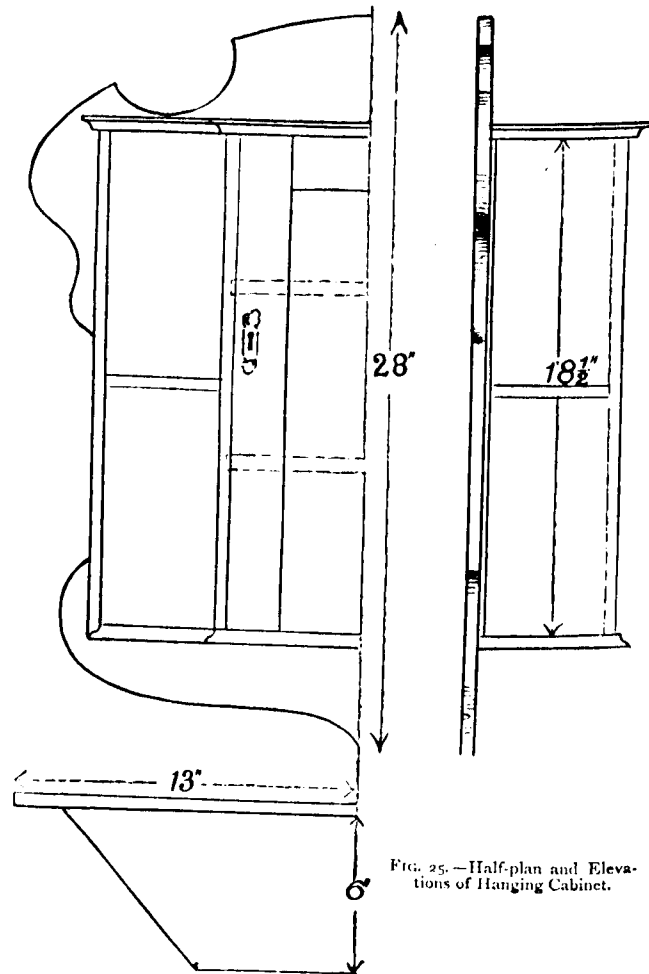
Half-plan and Elevations of Hanging Cabinet.
